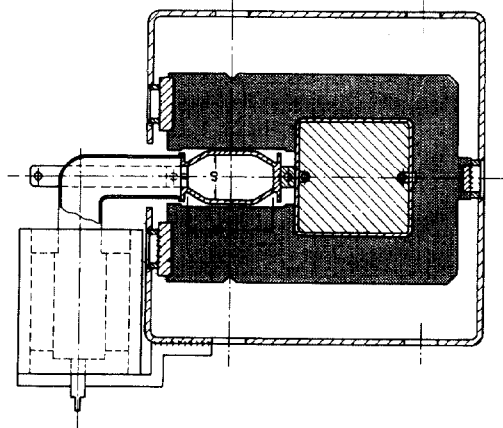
Cross section of a dipole magnet for the electron ring with vacuum chamber and pump
